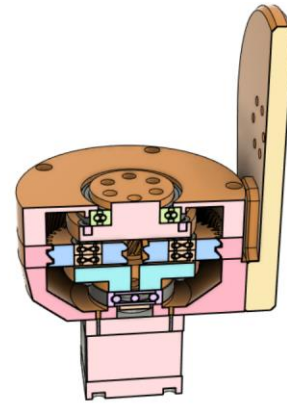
Joint 4 of v3 consisting of a self-designed planetary gearbox
